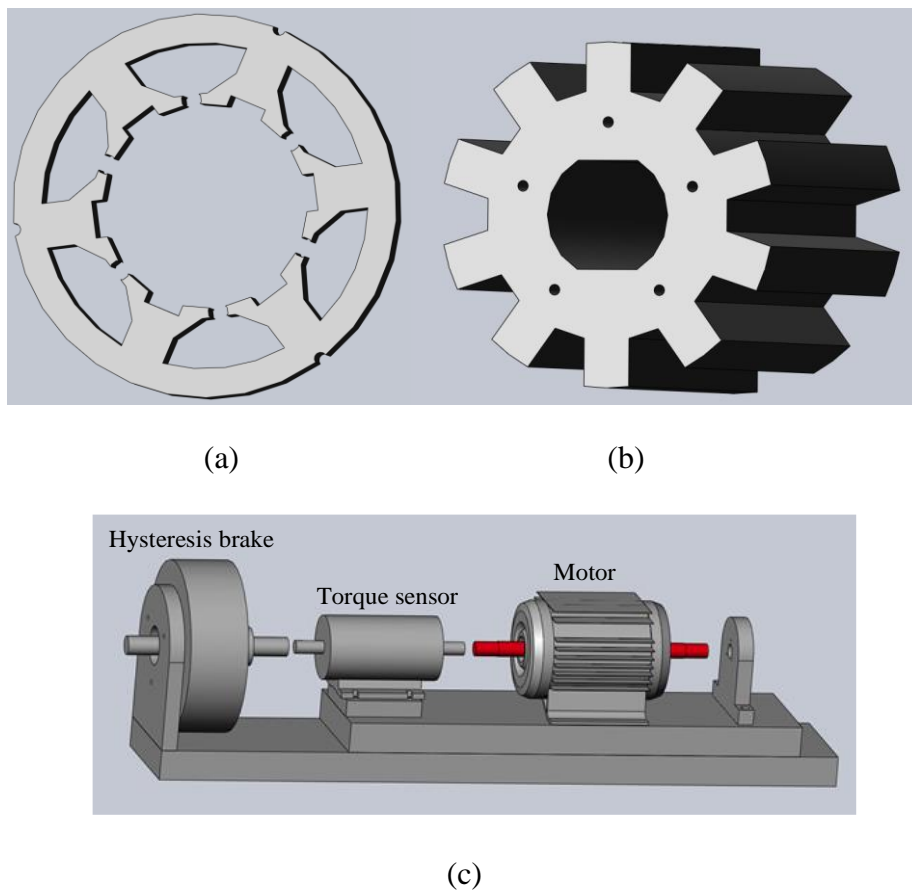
Mechanical structure of (a) stator (b) rotor (c) platform
